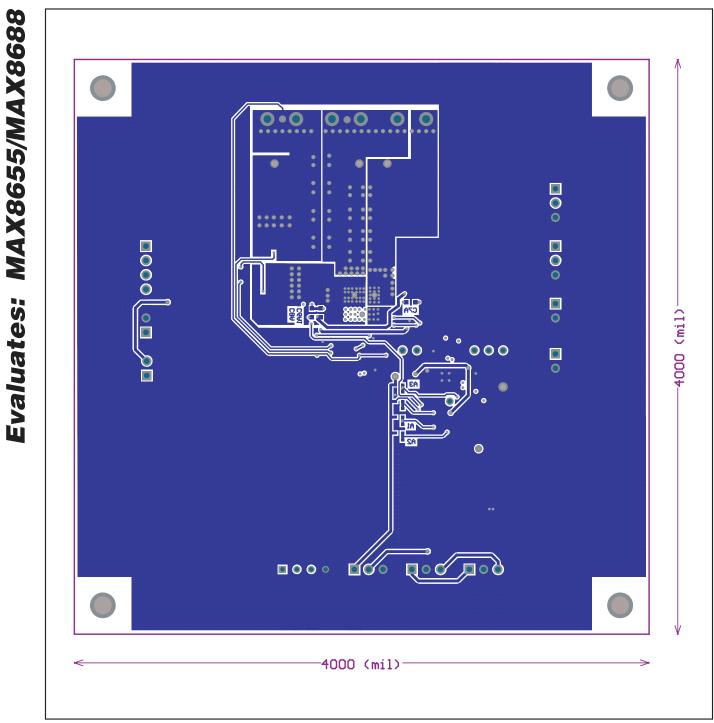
MAX8655 EV Kit PCB Layout—Solder Side
